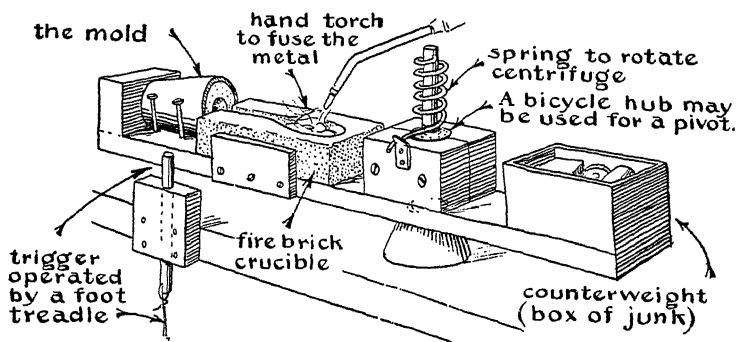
Lost-wax casting. Centrifuge method for filling the mold.
